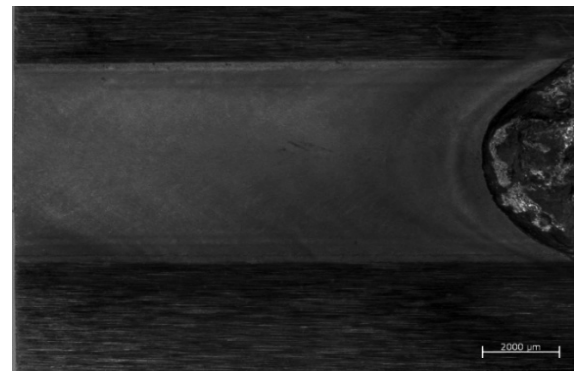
View of the transformed layer after melting HS6-5-3-8 steel, laser power 2.1 kW.
